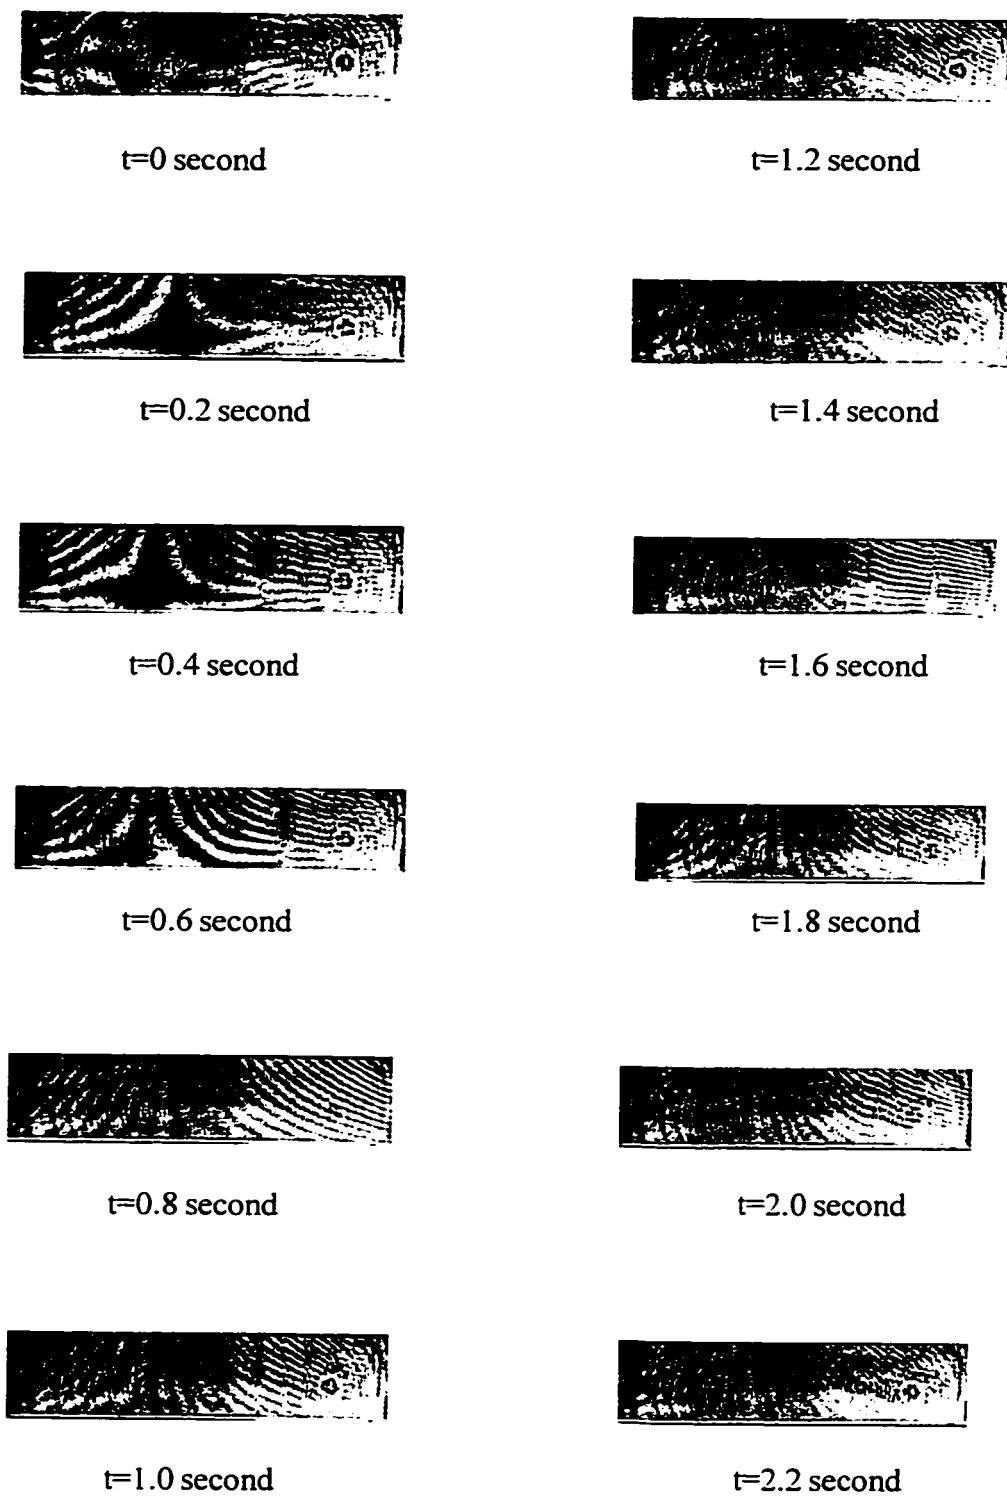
$u$ -field Morie Fringe Pattern for Alumina Specimen Drilling with AWJ
